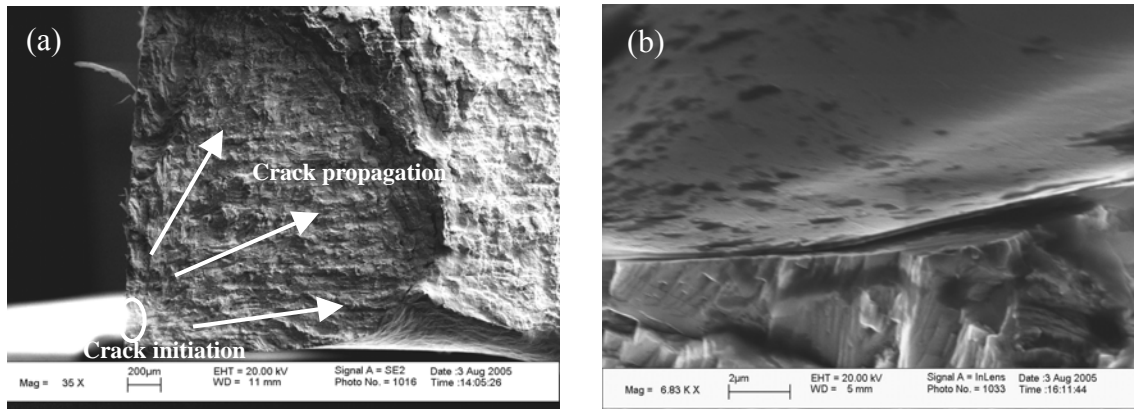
Fractography of the fatigued specimen with a 200 nm-thick film tested at $\sigma_{\max.} = 725$ MPa, (a) the whole fracture surface, and (b) the fracture surface near the film.
